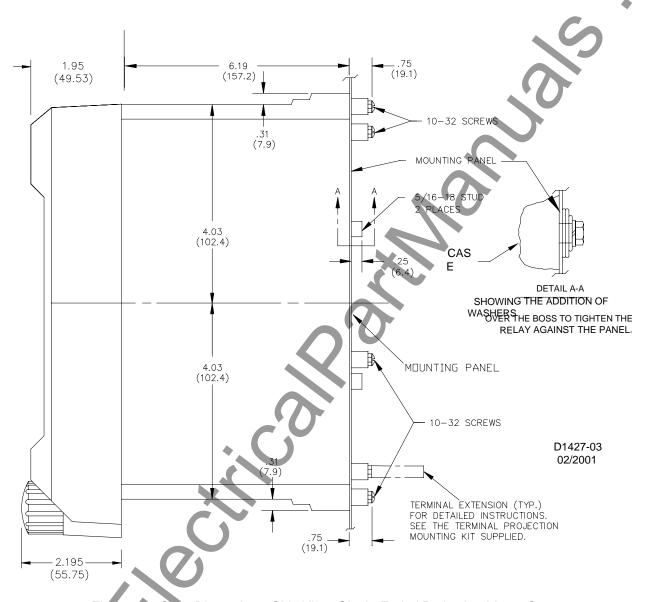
Case Dimensions, Side View, Single-Ended Projection-Mount Case
